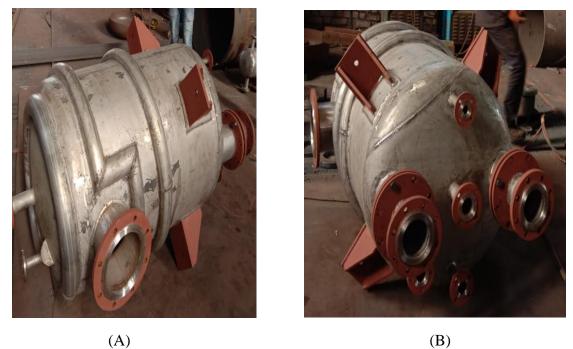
Sai Ratna Engineering and Fabricators, Vapi
